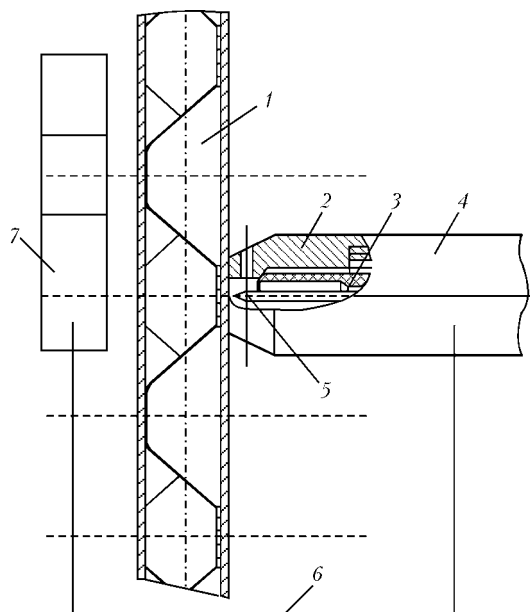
Schematic of ASW of a three-layer panel: 1 — three-layer panel; 2 — support nozzle; 3 — ceramic insert; 4 — welding torch; 5 — nonconsumable electrode; 6 — rigid tie; 7 — tracing system
